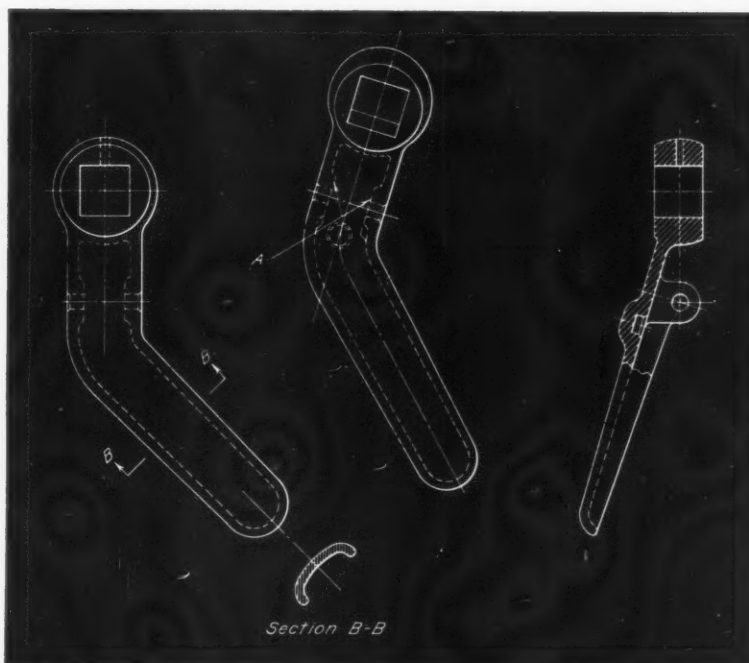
Cast offset handle, milled between lugs (A) to a tolerance of 0.002 inch on the fixture shown in Fig. 2
